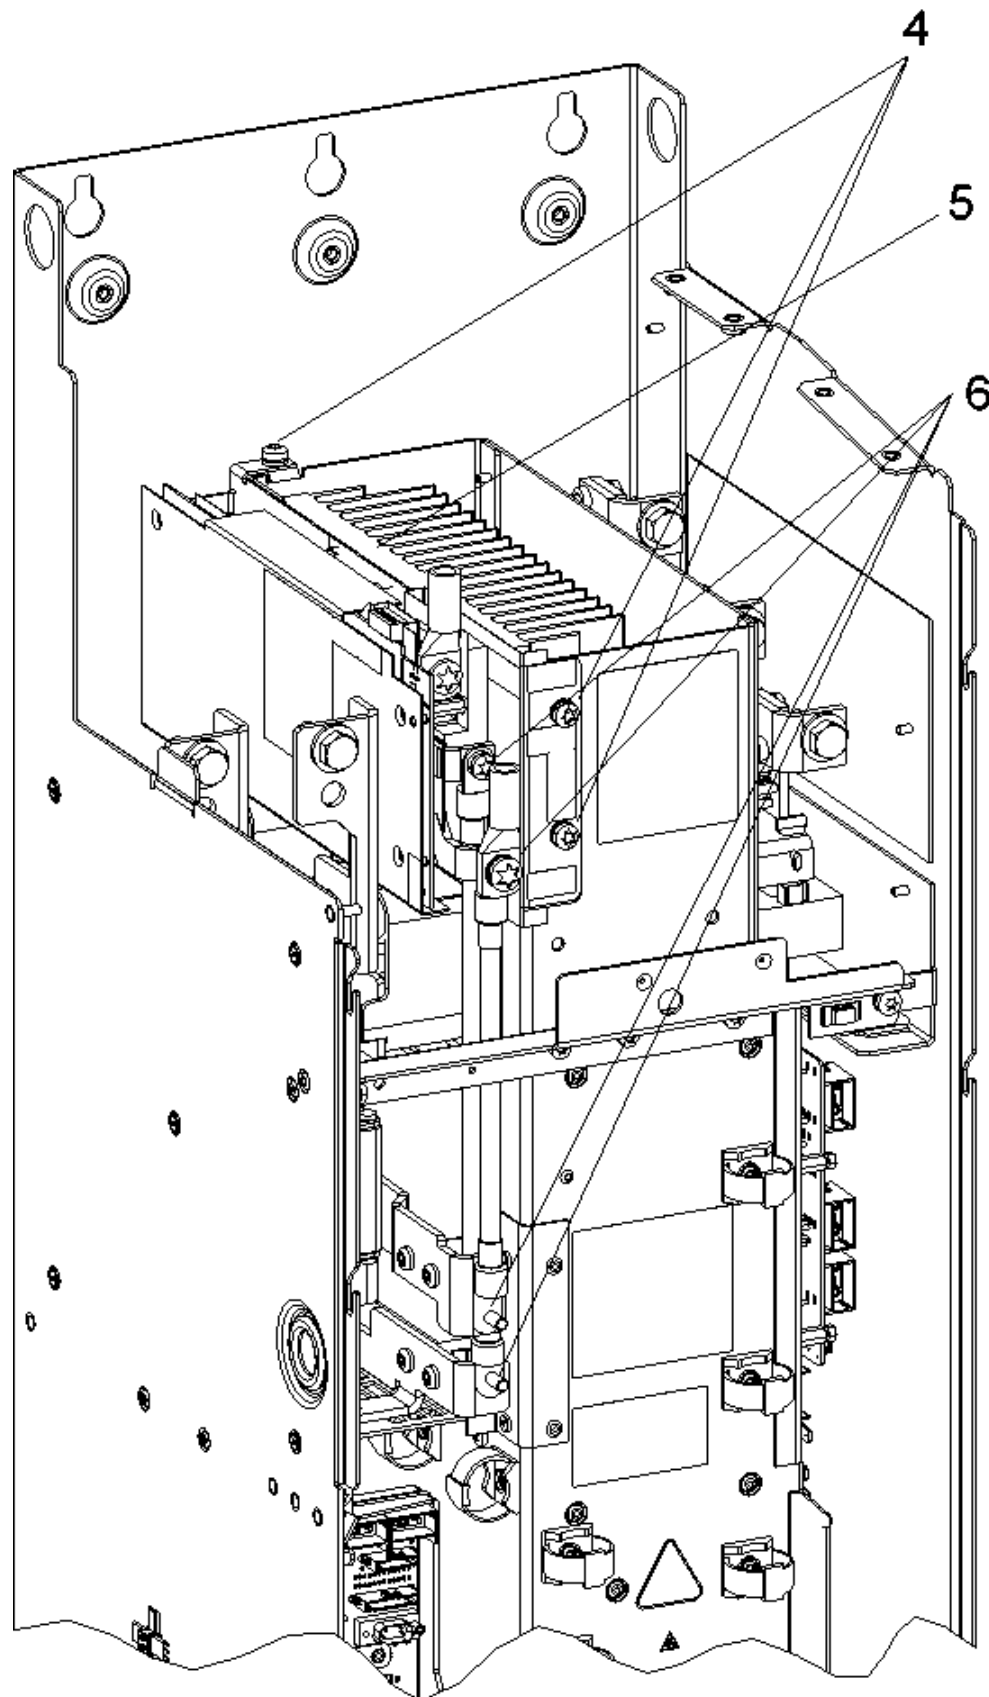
Installing a Braking Module in an Active Line Module or a Motor Module (type FX) – steps 4 -6
